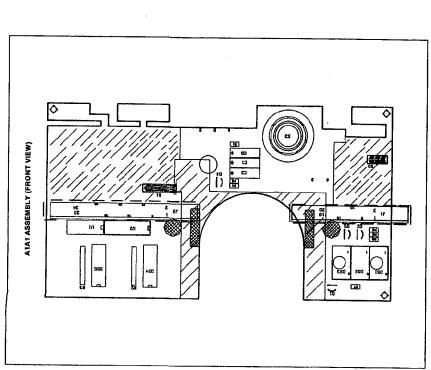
A IAN RF Output Front Panel Assembly Component Locations
